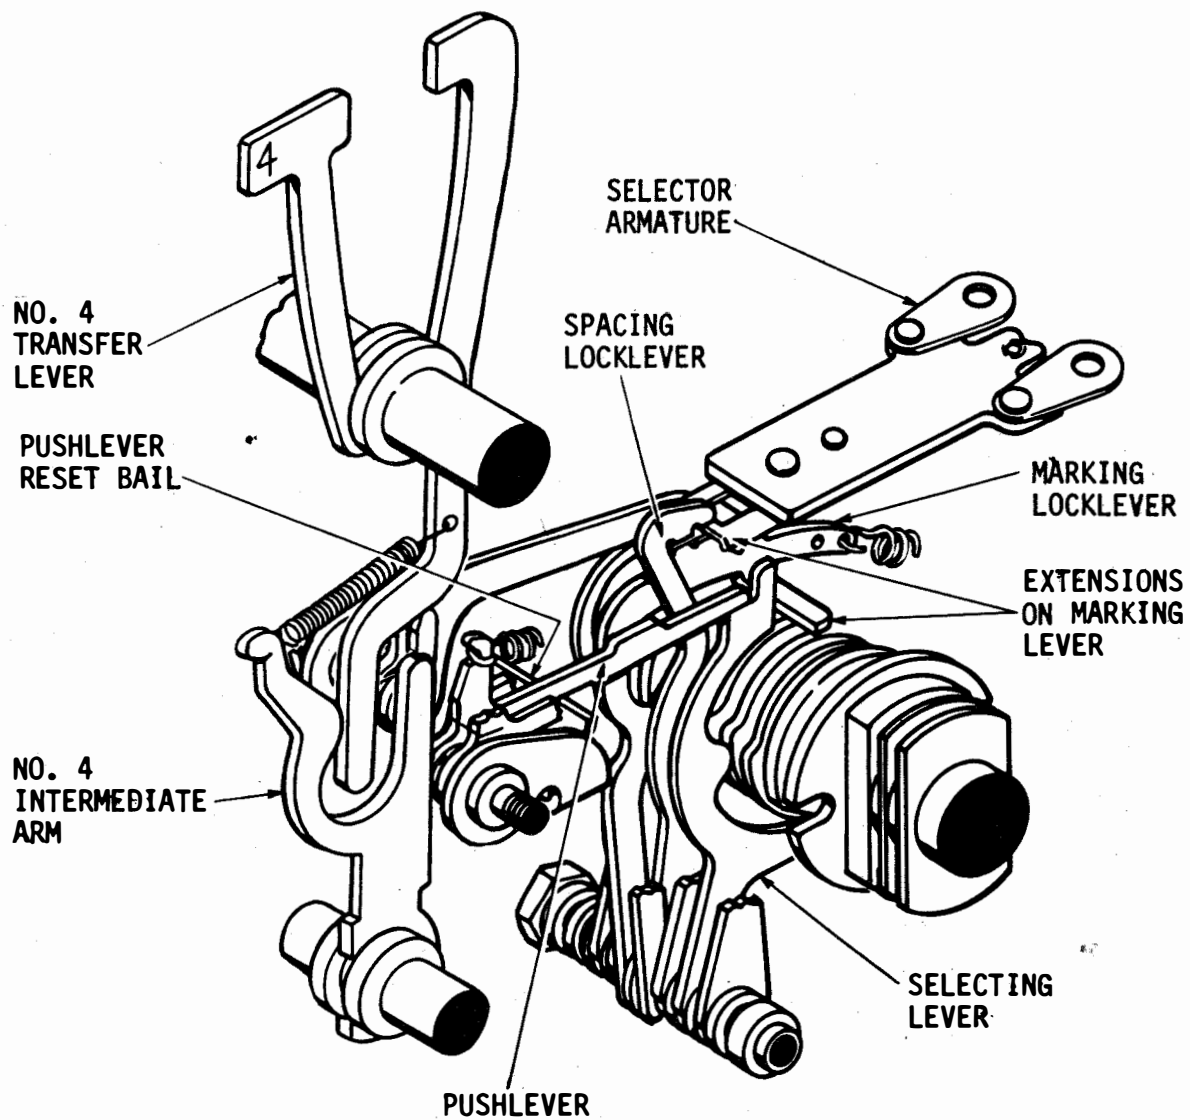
Selecting Mechanism and Transfer Mechanism, Right Front View
